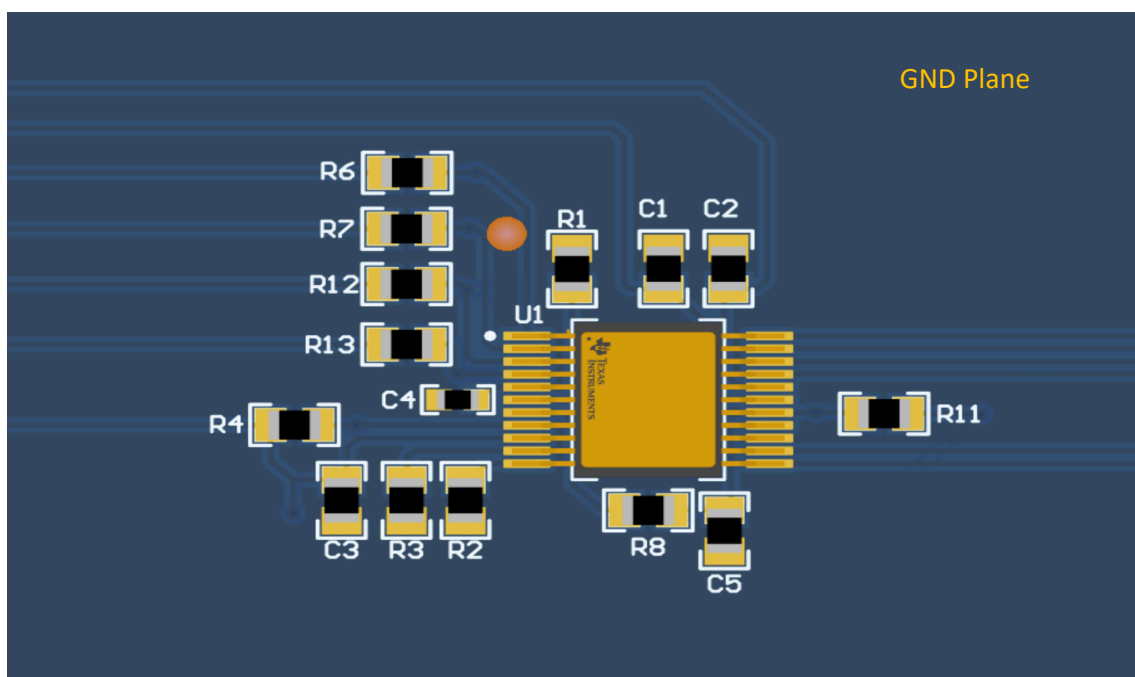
Printed Circuit Board Layout Example: Top Layer 3D View
